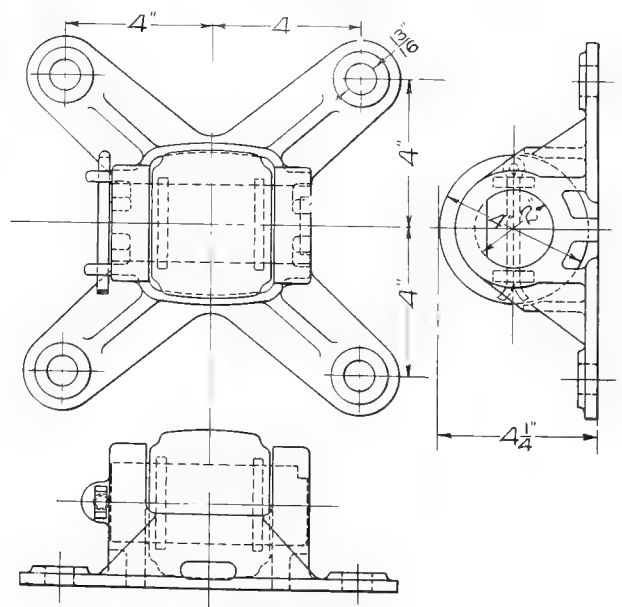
Economy Single Roller Side Bearing for Freight Service.
